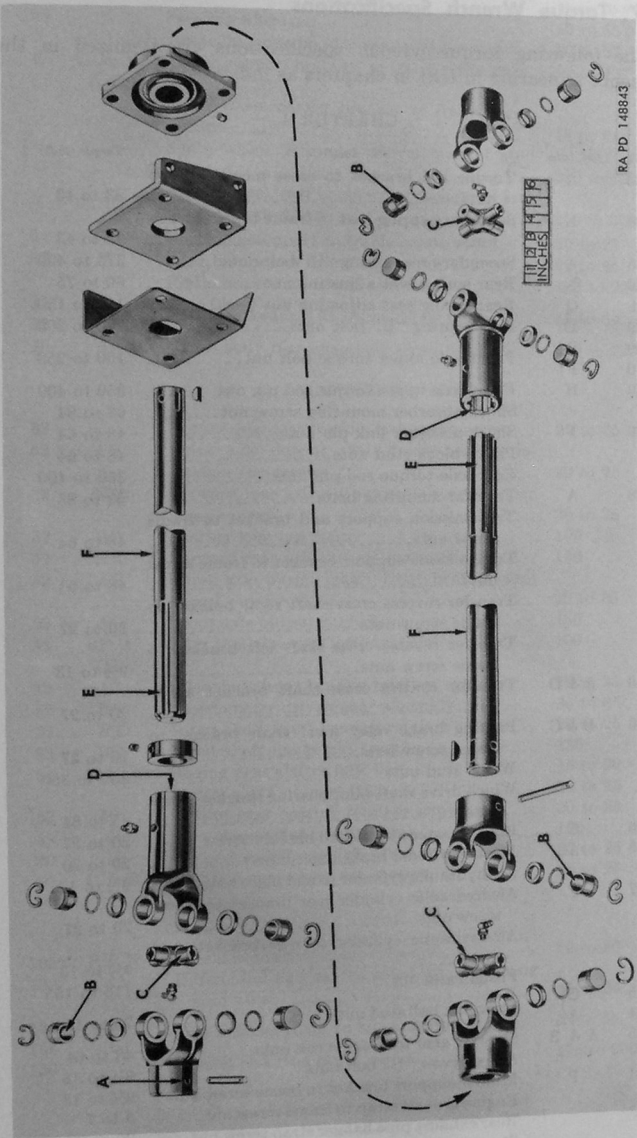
Repair and rebuild standard points of measurement for winch drive line components.
